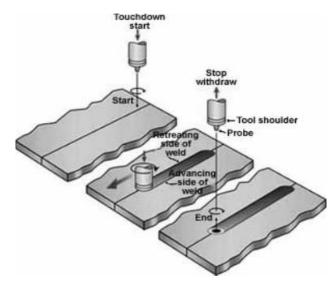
Friction Stir Welding Process (Narashima et al, 2011 in Khan, M.A. dan. R. Alhadi. 2014.)
